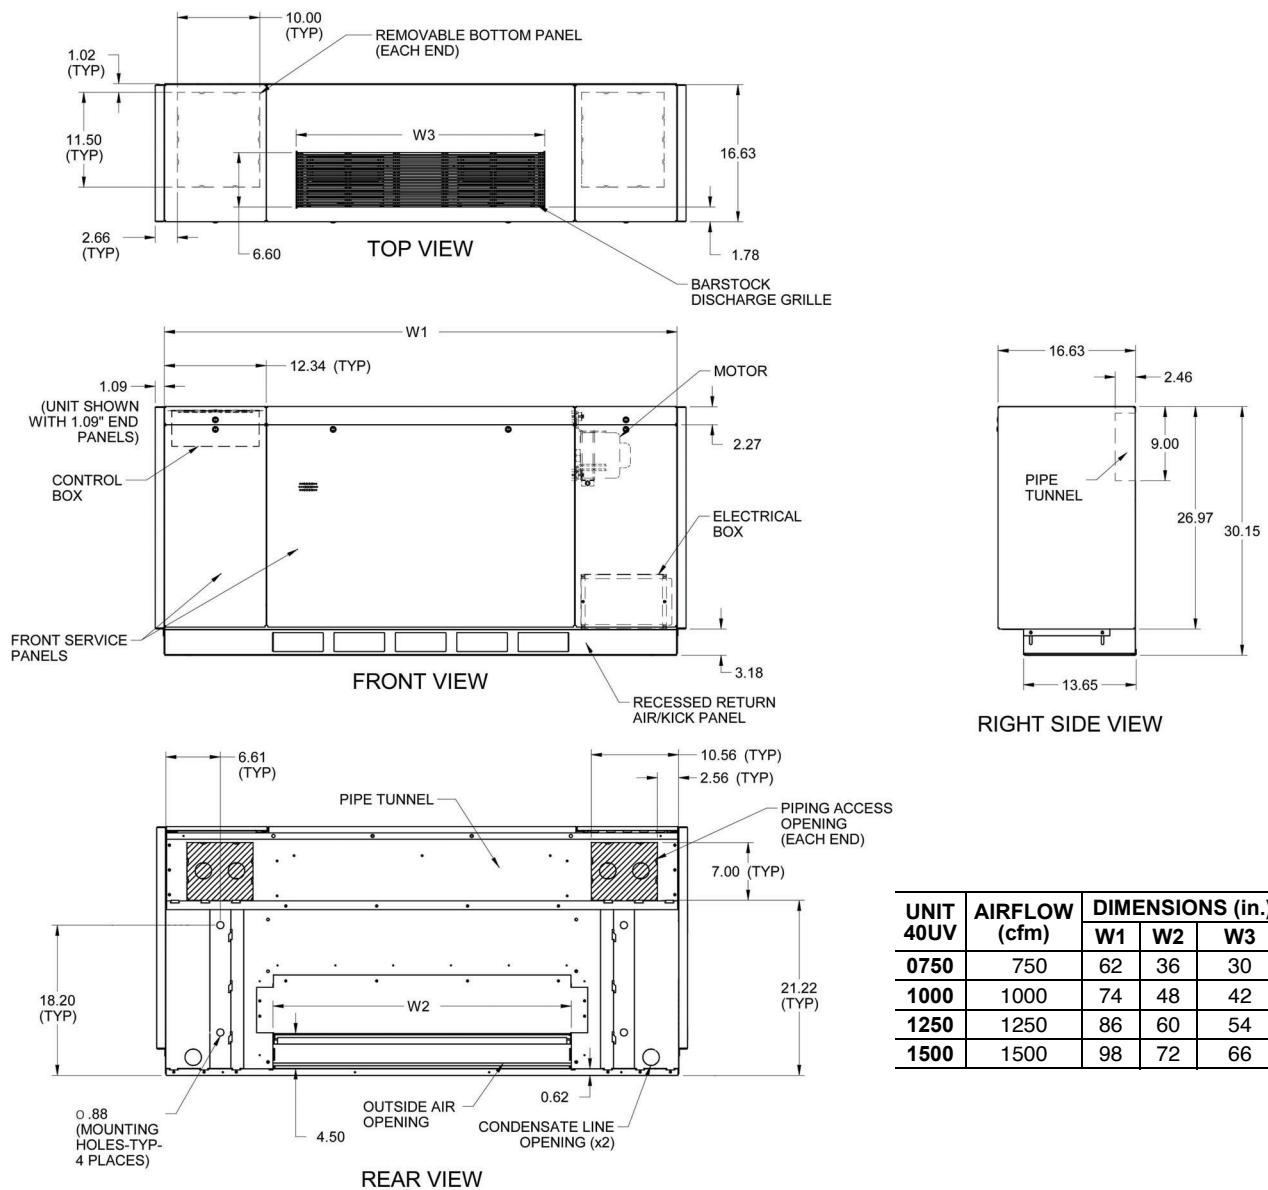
40UV Dimensions — 16-5/8 in. Depth — Floor Mounted Units (Standard)
